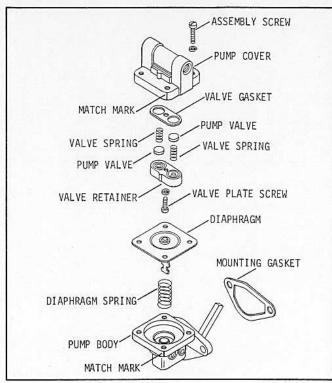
FUEL PUMP (MECHANICAL TYPE)
